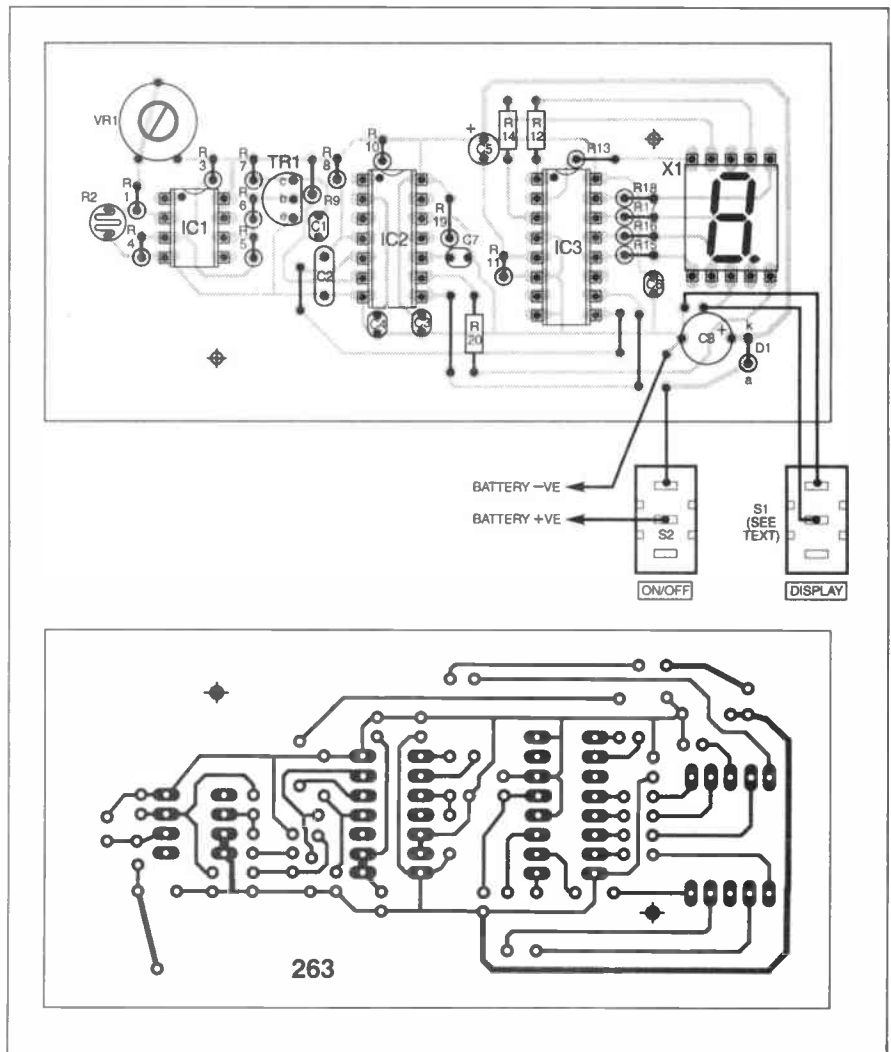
Printed circuit board component layout, full size underside copper foil master pattern and wiring to the two off-board switches.
